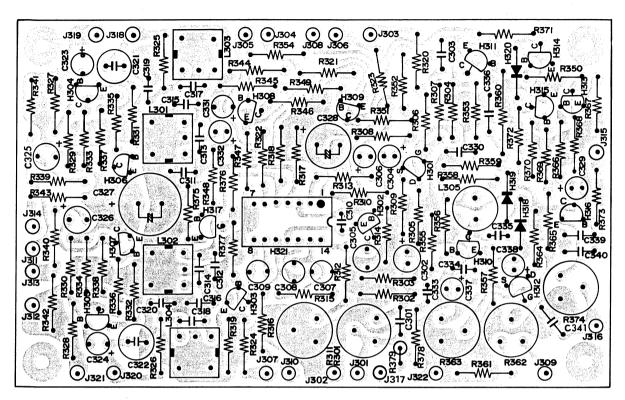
MPX Stereo Decoding Amplifier Assembly P300 Component Locations
